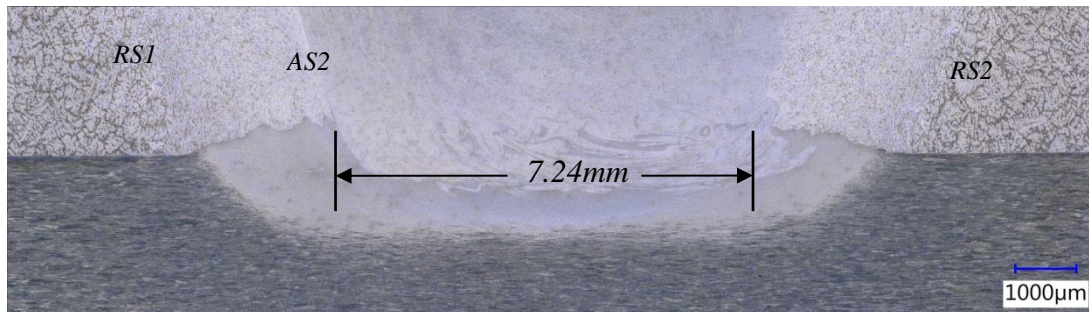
Thinner/faster/cast build usable weld nugget dimensions
